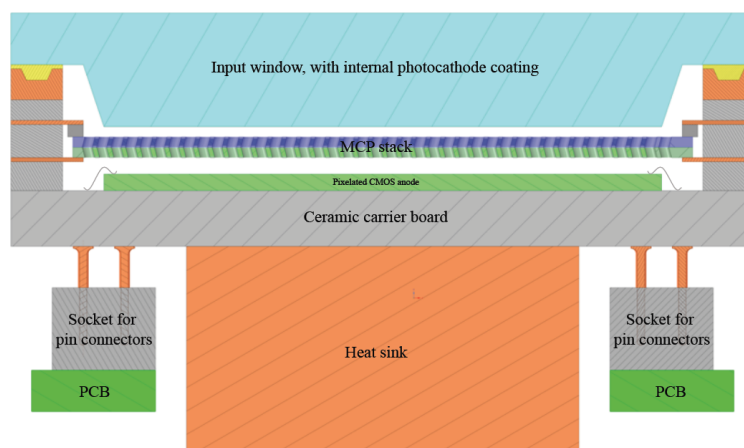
Section view of the detector, connected to the carrier PCB and heat sink.
